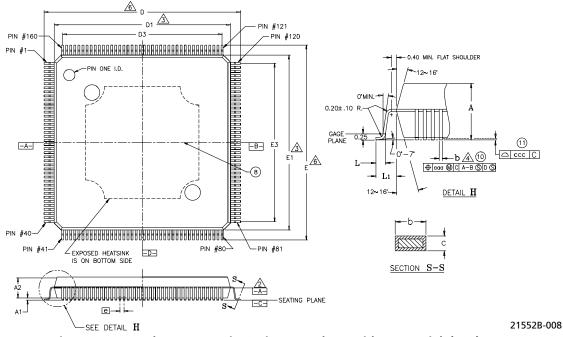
160-Lead Square Metric, Cavity-Up Package with a Heat Sink (PQE)
